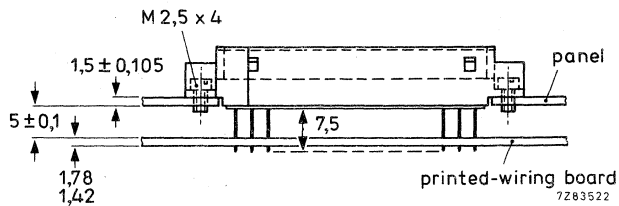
Mounting example of a male part with dip-solder pins (7,5 mm).
